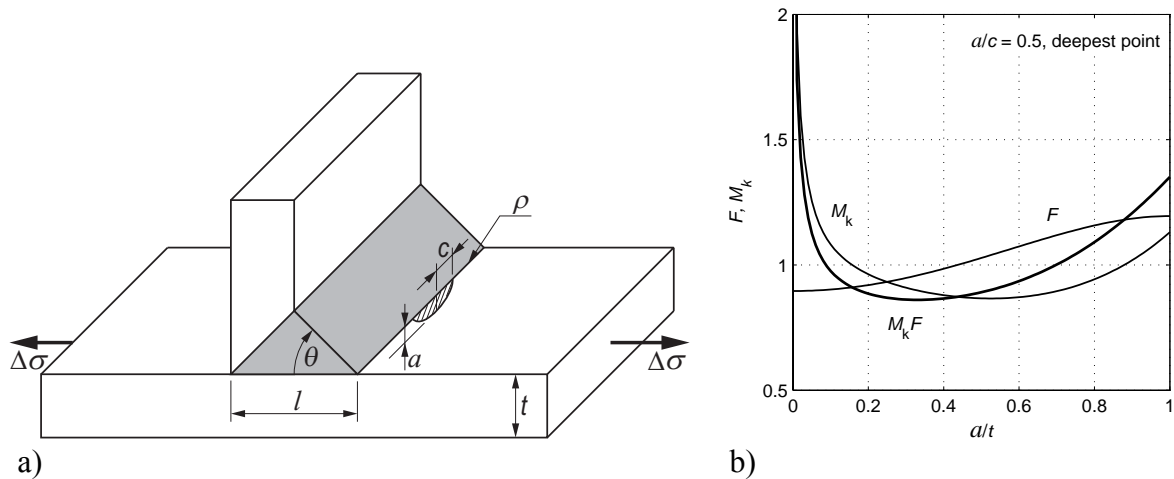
(a) Geometry and variables used to derive M_k equation [5], (b) M_k ($\theta = 45^\circ$, $l/t = 2$) for “as welded” weld toe radius [5] and F as functions of a/t .
